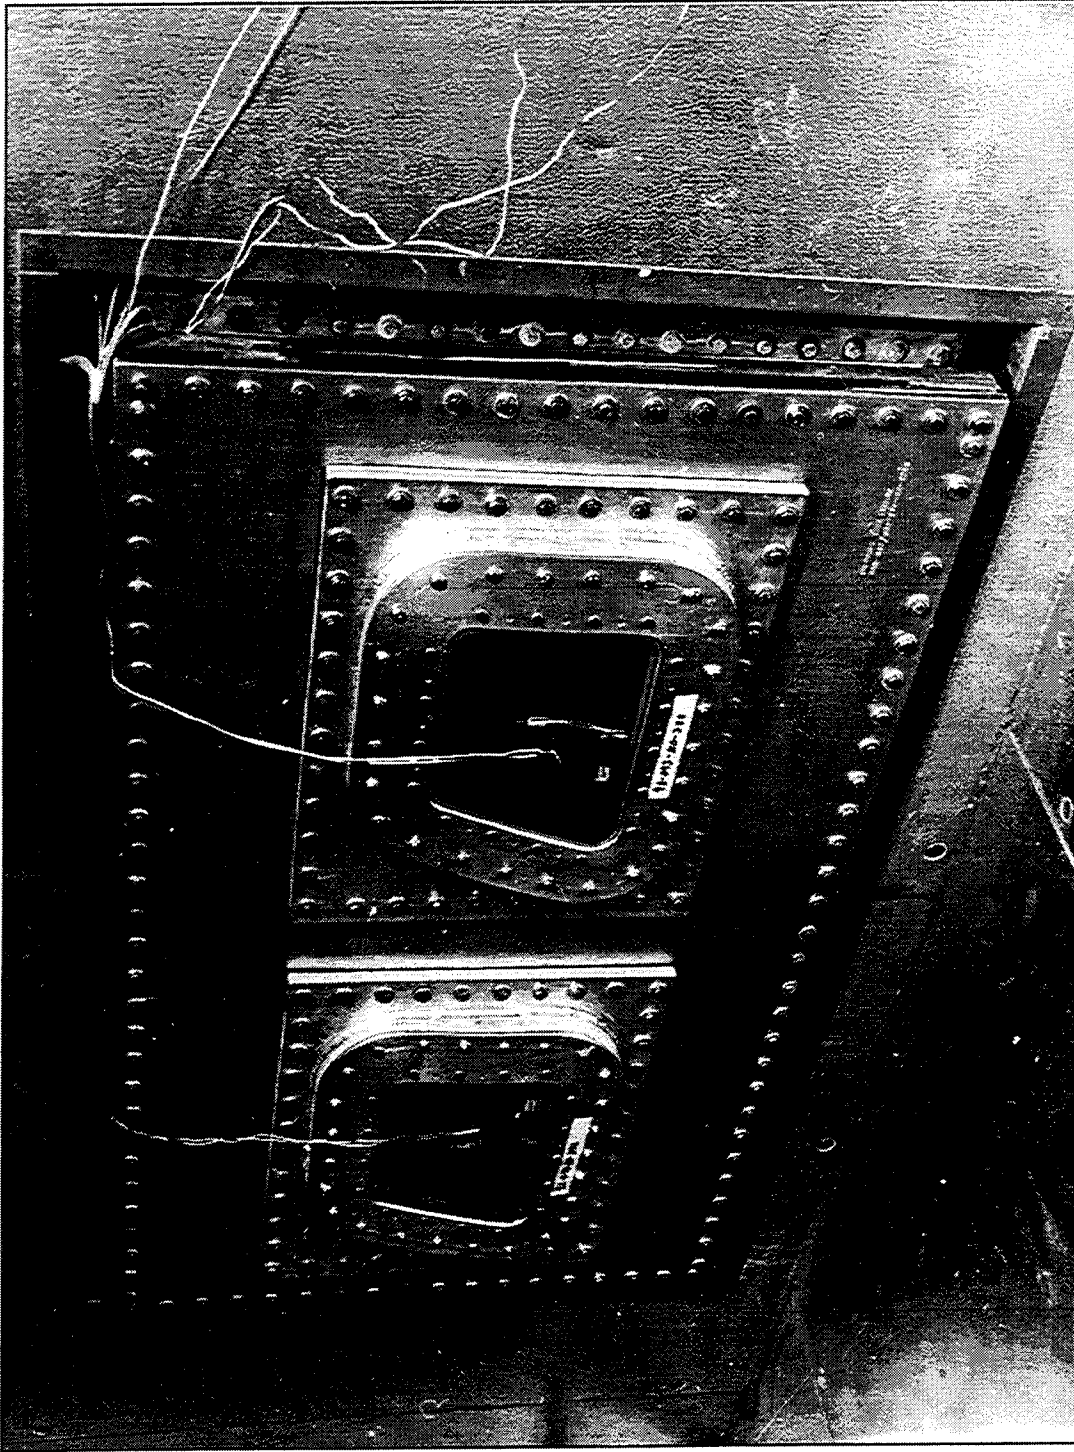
Typical C/KC-135 #4 W/WS Pressure Integrity Test Set Up
